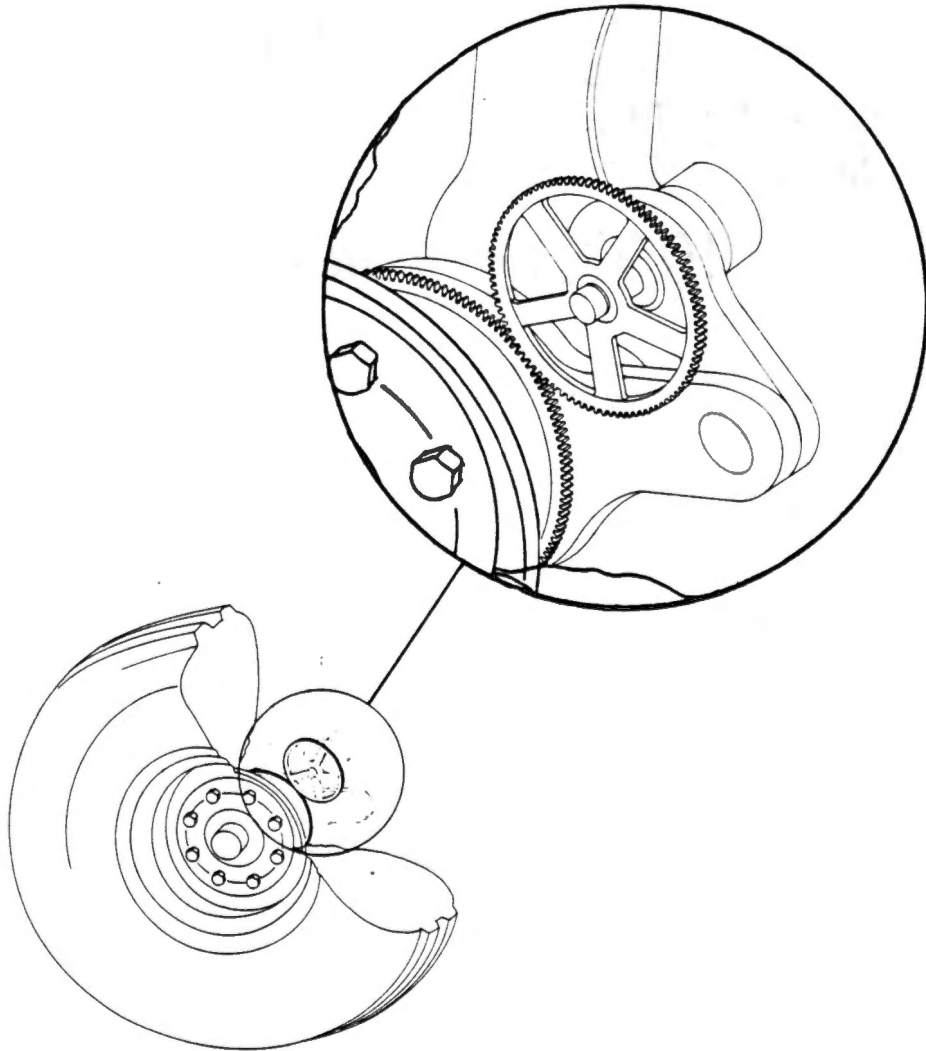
Assembly used for the measurement of front wheel rotation (Tompkins et al., 1985). Components are: (1) optical encoder, (2) mount arm, (3) encoder gear, (4) tire rim gear.
